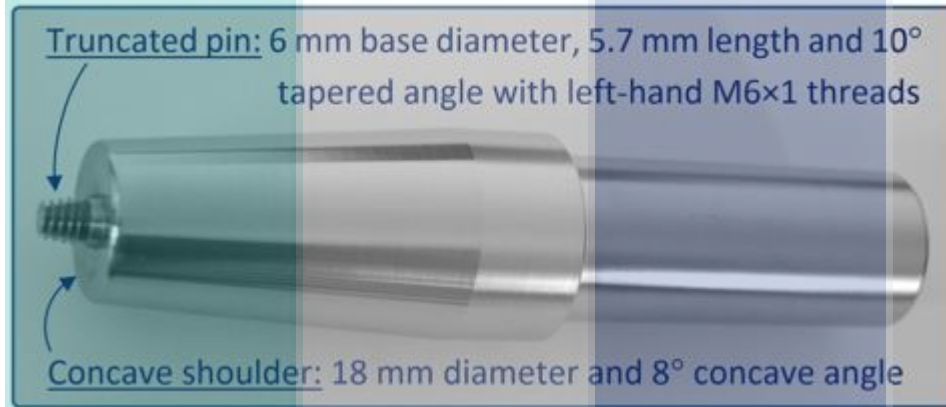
Geometry and dimensions of the welding tool
